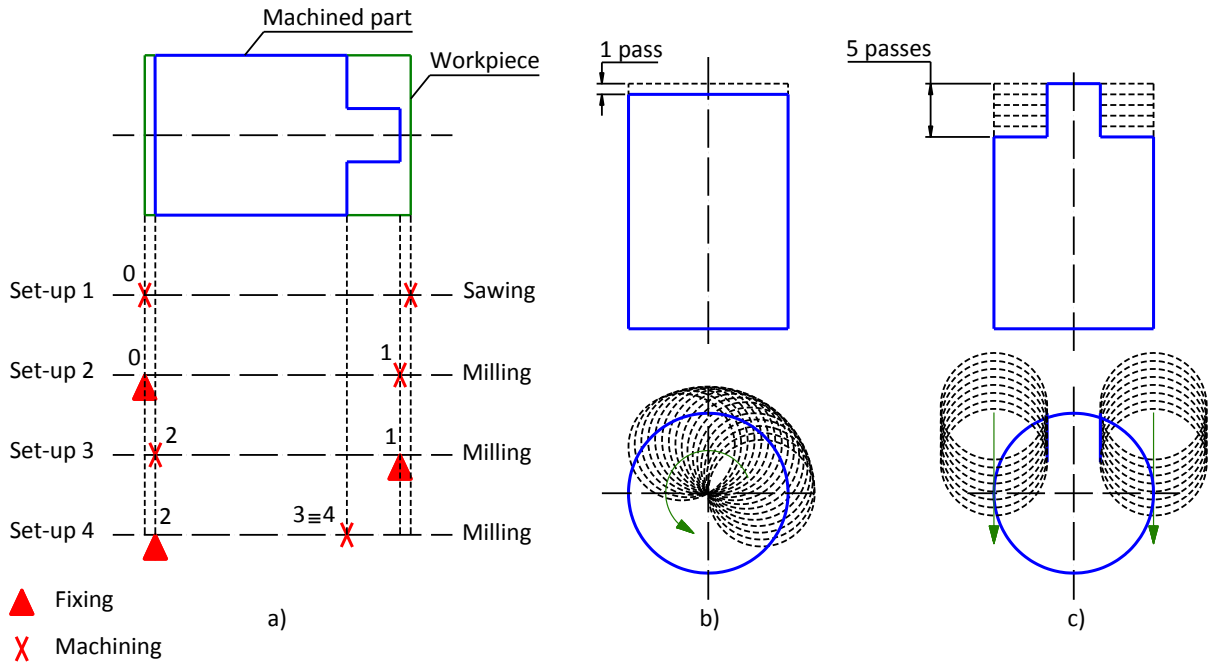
Process plan (a) and tool paths on machined planes (b,c)
